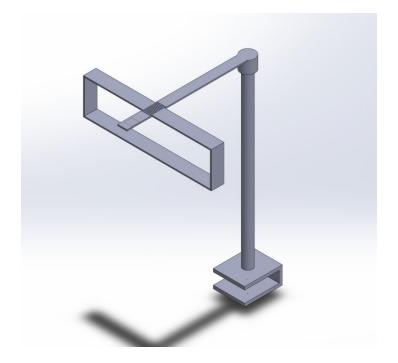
Stand assembly which holds the case assembly and mounts to a table
